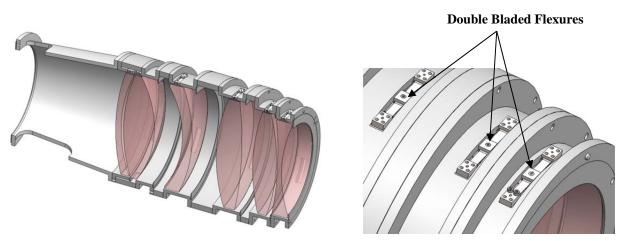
Red Camera Assembly - Mounted Optics are Stacked Flange-to-Flange
